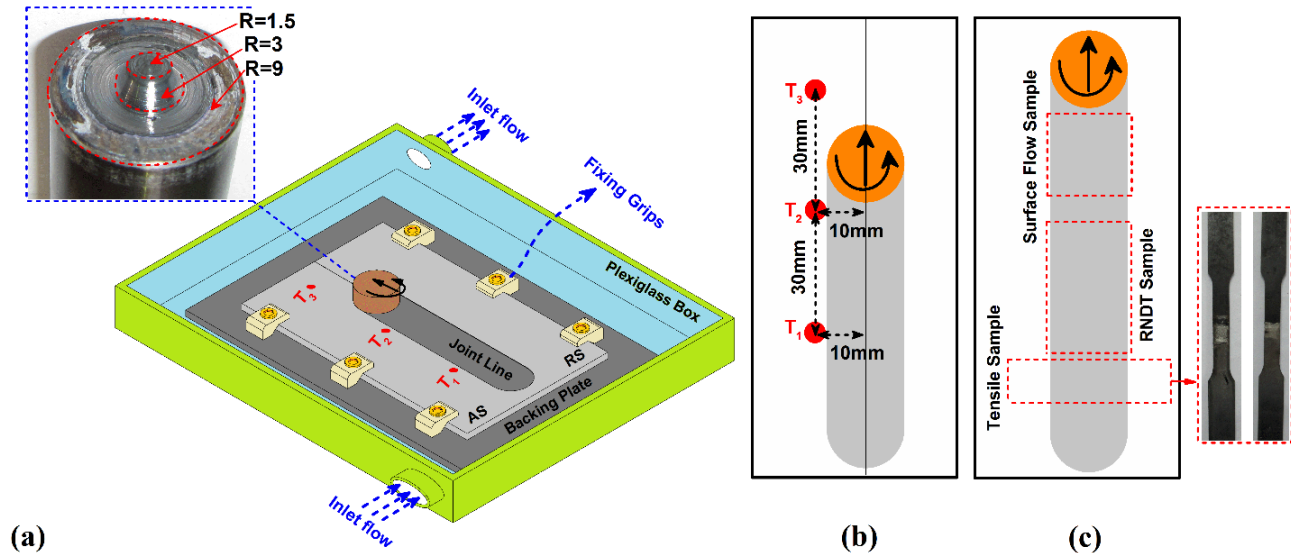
(a) Schematic view of welding setup, (b) thermocouples position, and (c) mechanical test sampling.
